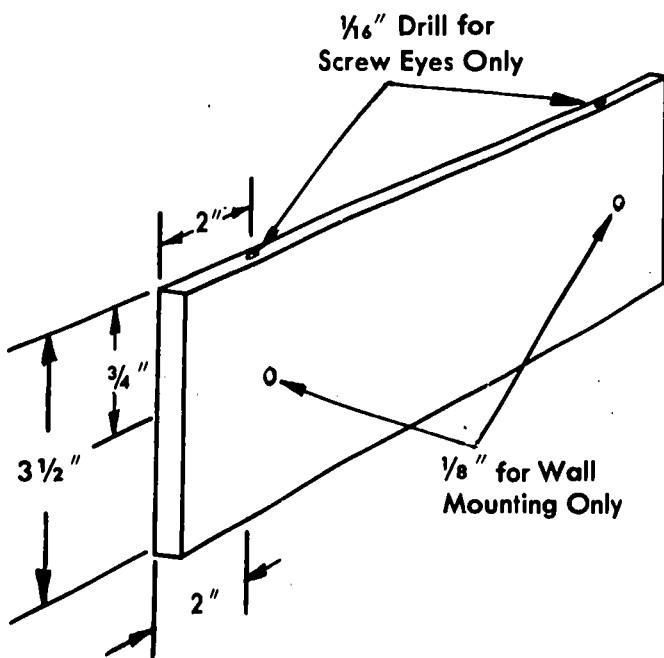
A-5. Locating Holes for Mounting House Marker with Screw Eyes or on the Wall
